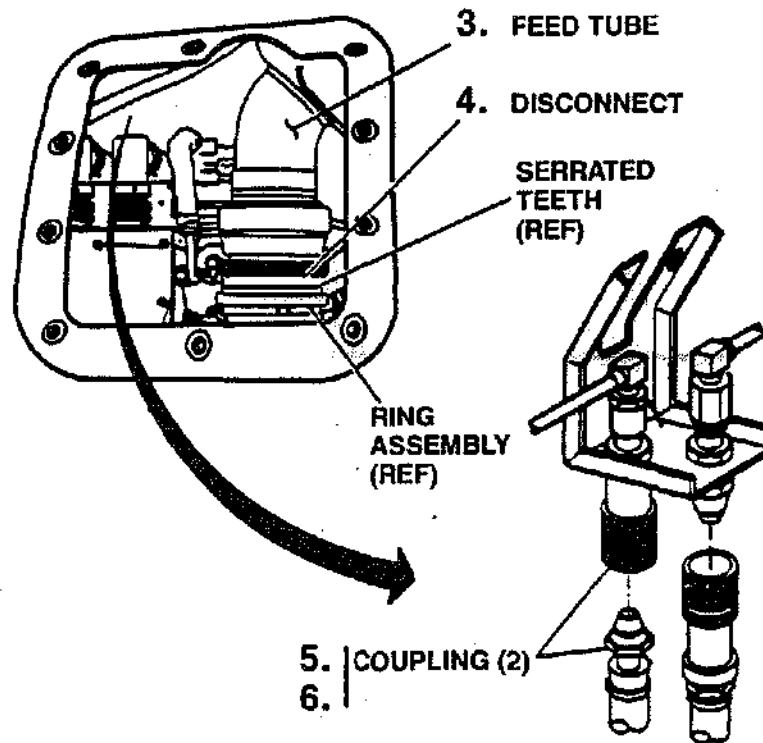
F110-GE-100 Fuel Inlet and Electronic Fuel Cooling Interface Couplings
